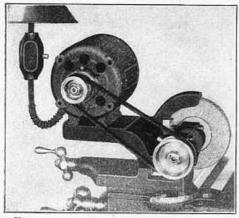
No. 15 Electric Grinder Mounted on Compound Rest of the Lathe
